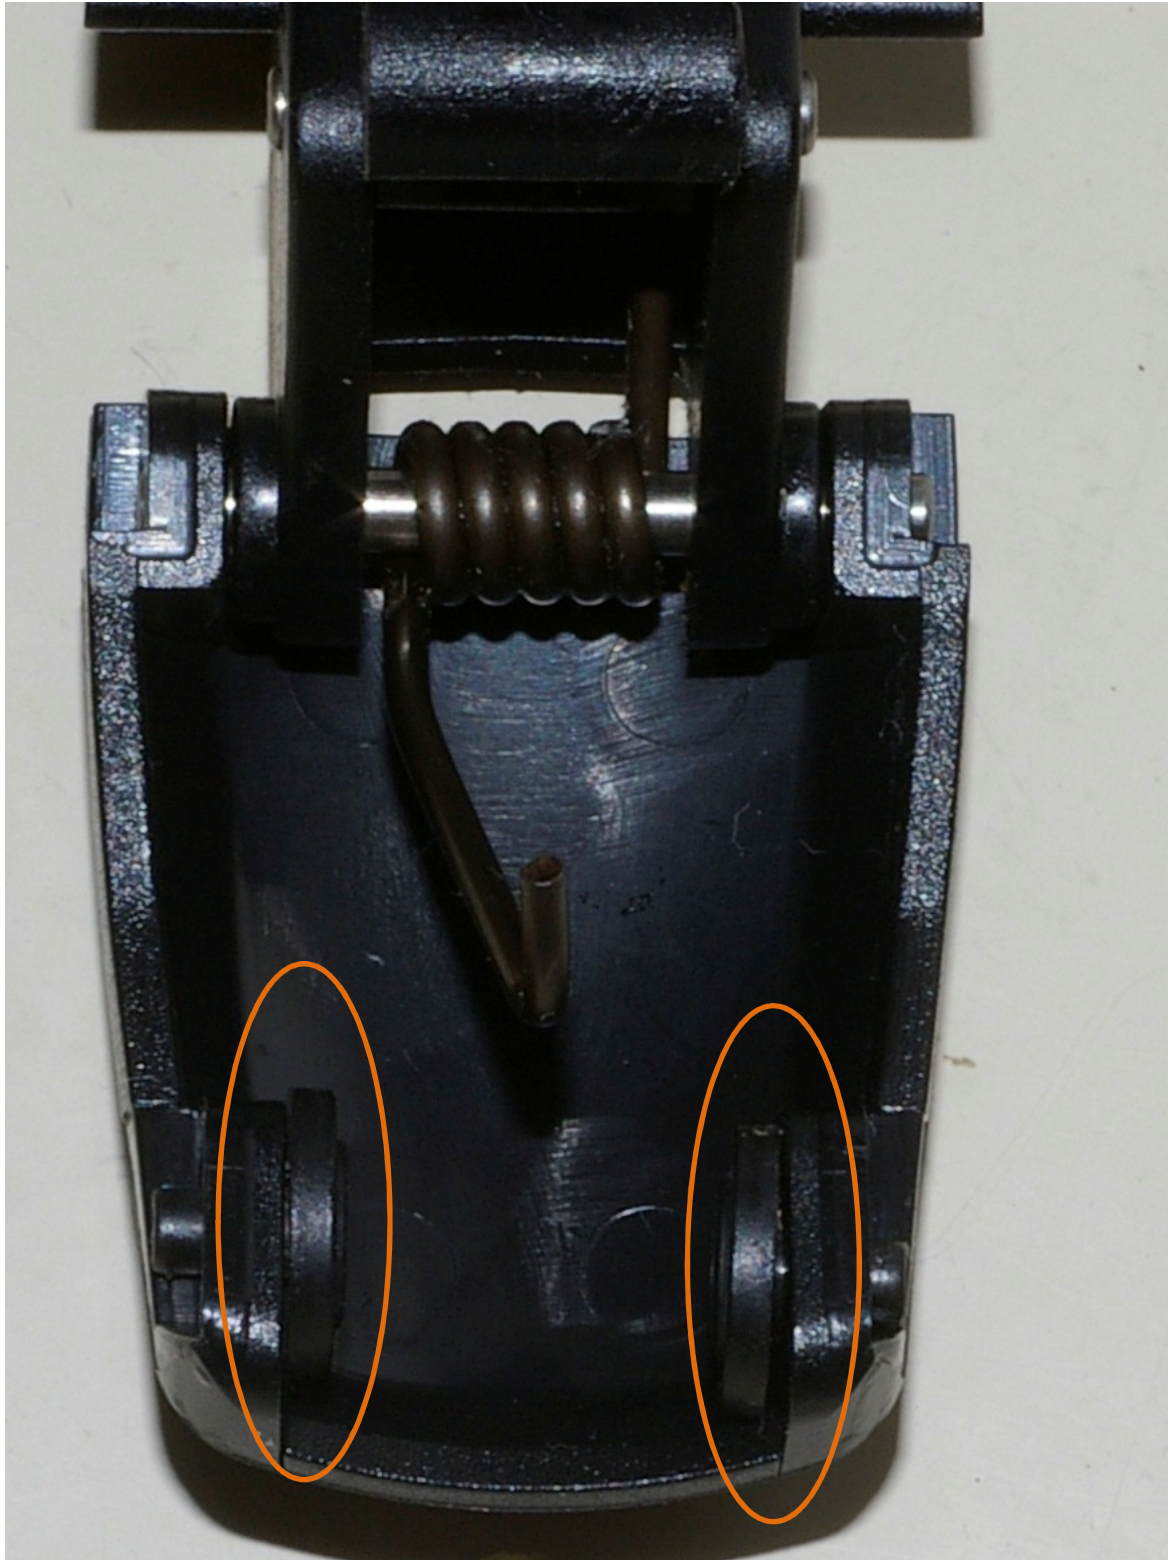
Before installing bottom pin, the two plastic bushings must be in place. Once the bushings are installed in the bottom slots of the button just rotate the button and align the pin hole to install the lower pin, a light press fit
